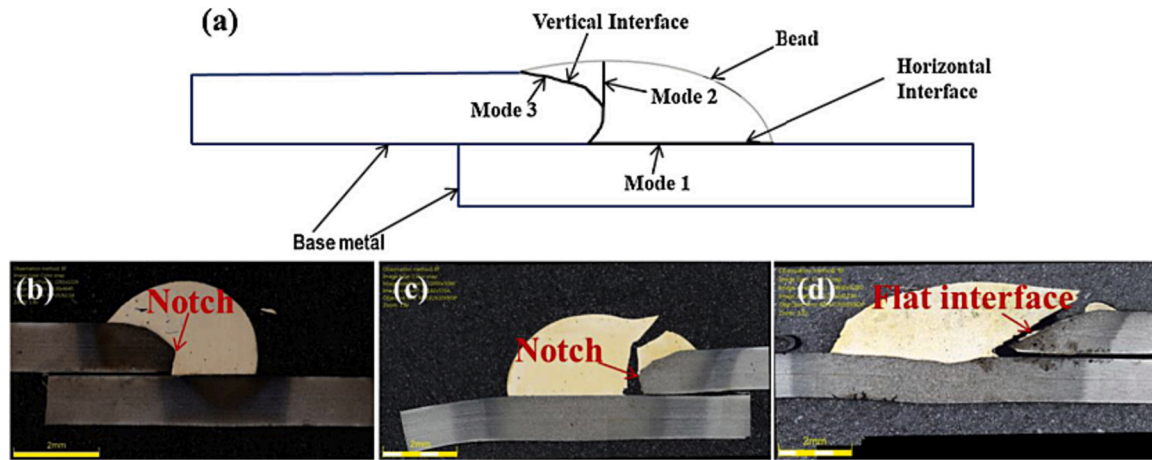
Different failure locations (interface, bead, and base metal) of GMA brazed joints during shear-tensile loading (a) top view and (b) cross-section [69].
